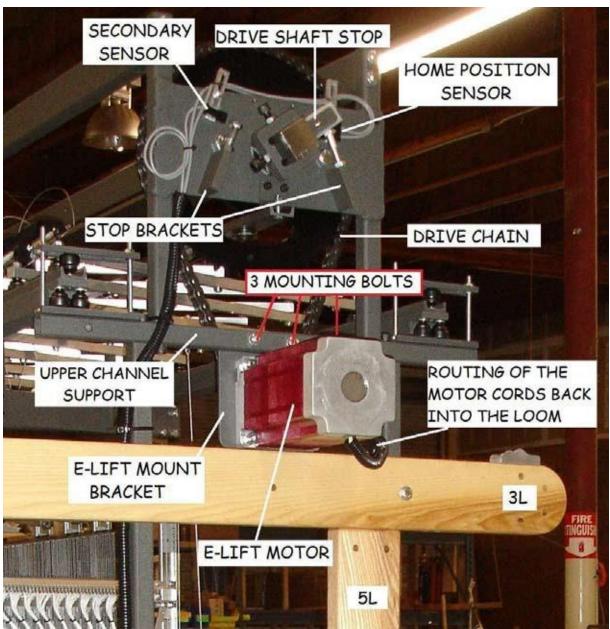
E-Lift parts installed (Main Drive Sprocket not visible)
